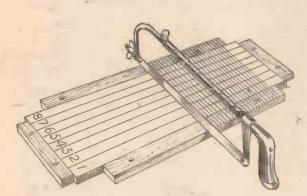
Marking out and cutting the grooves in the supporting strips.
